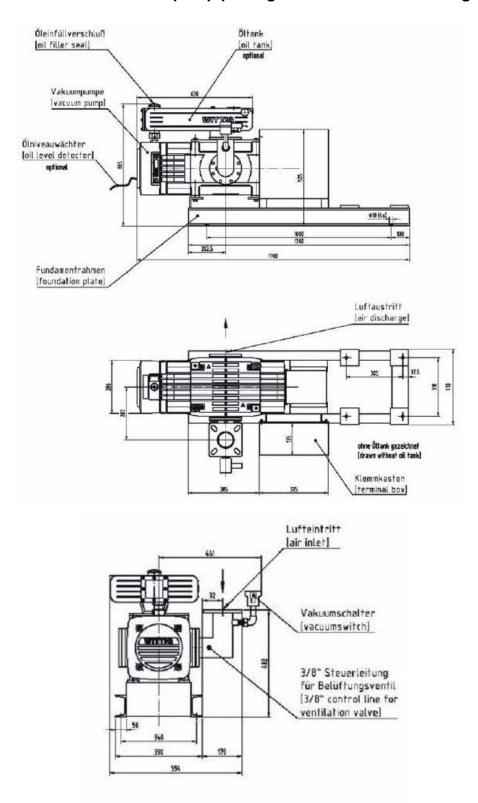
Details of the vacuum pump package for braking systems RFL80
